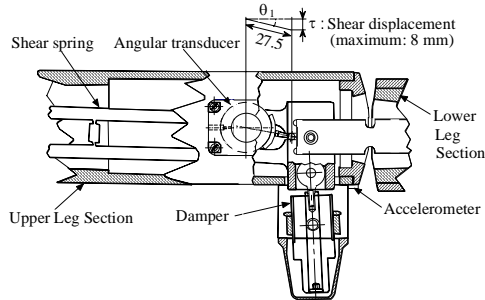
Shear spring at maximum shear displacement (dimension in mm)
